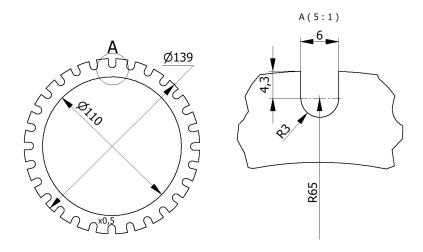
Rotor Sheet & Rotor Slots of Torsional Torque Generator
